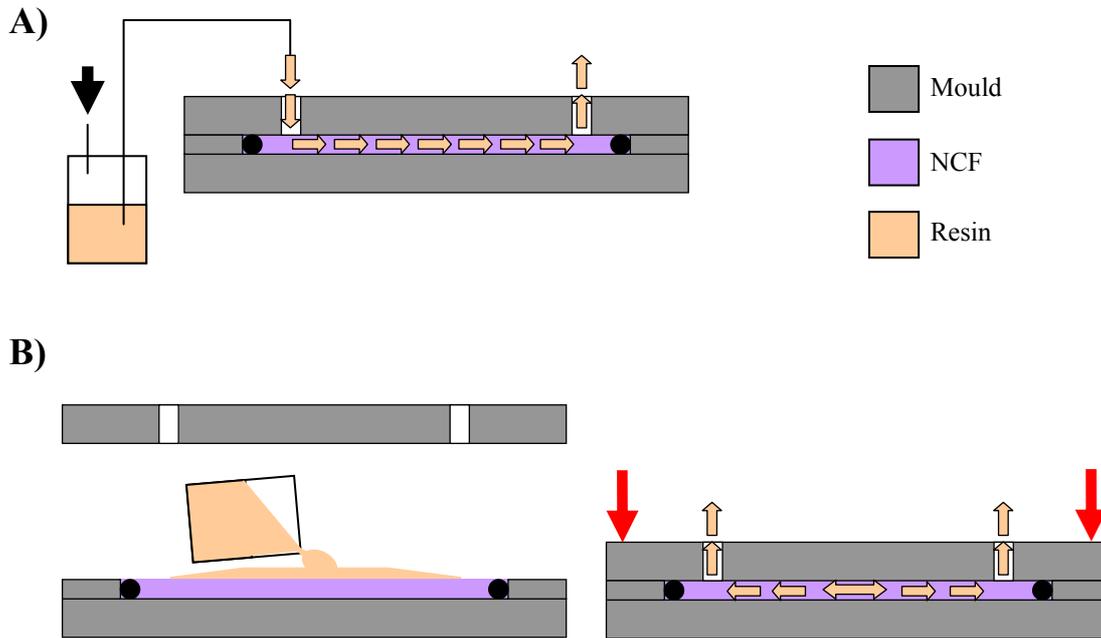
Manufacturing principles: A) conventional RTM and B) compression moulding in RTM-tool of hand-impregnated pre-form.
